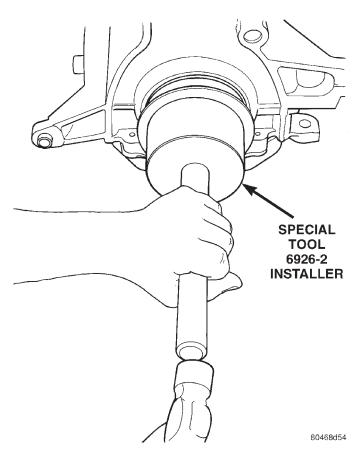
Rear Crankshaft Seal—Installation CRANKSHAFT
